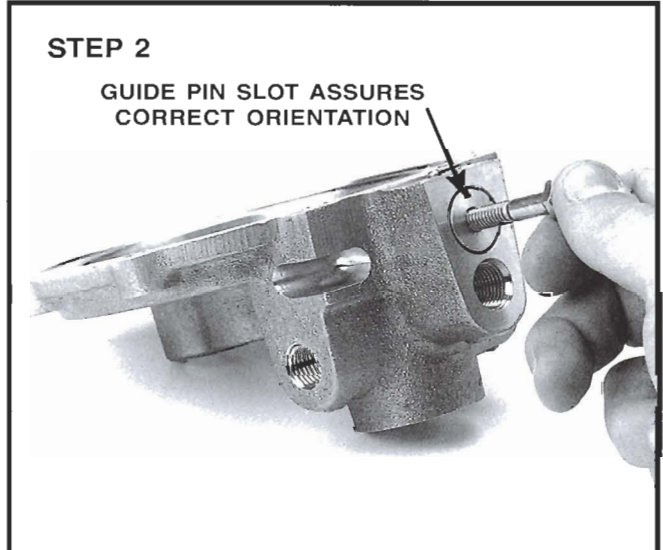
Use a 5/16"-18 UNC bolt to push the Pivot plug / Lever assembly into place. Remove the bolt when complete.
